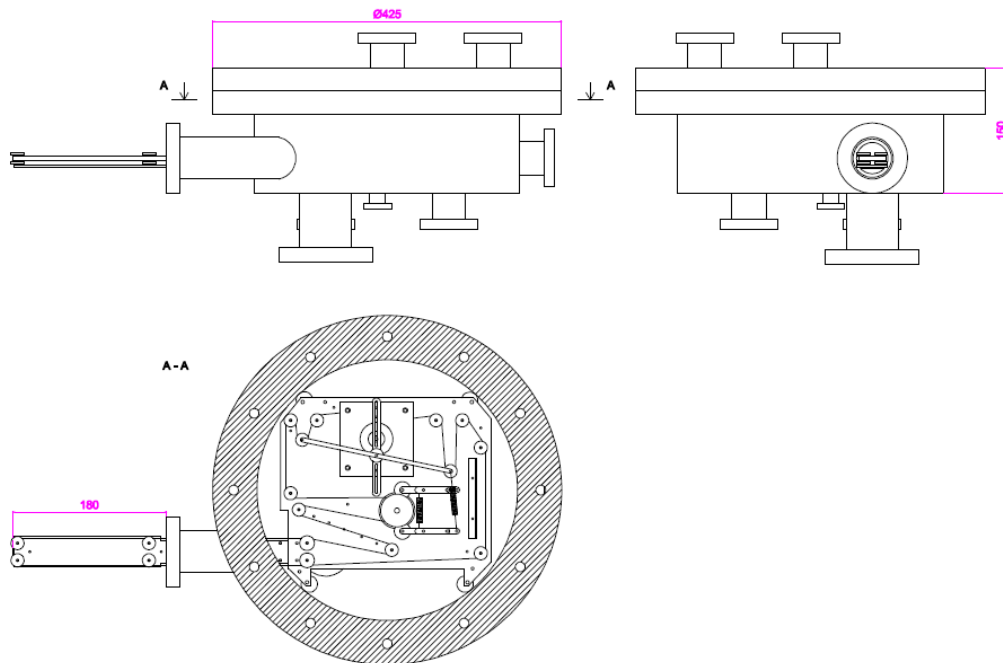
Technical drawings of the vacuum chamber of the TATRA system.
